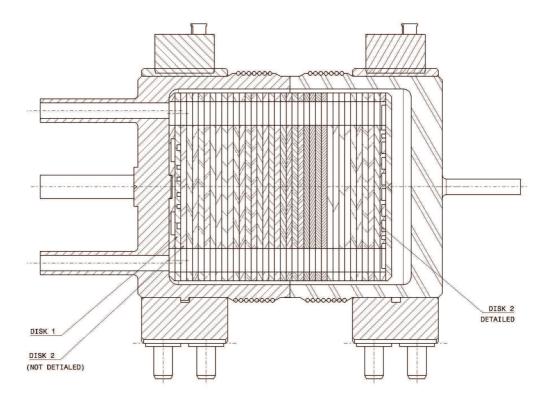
Section view of Heat eXchanger in plane of symmetry (drawing).
